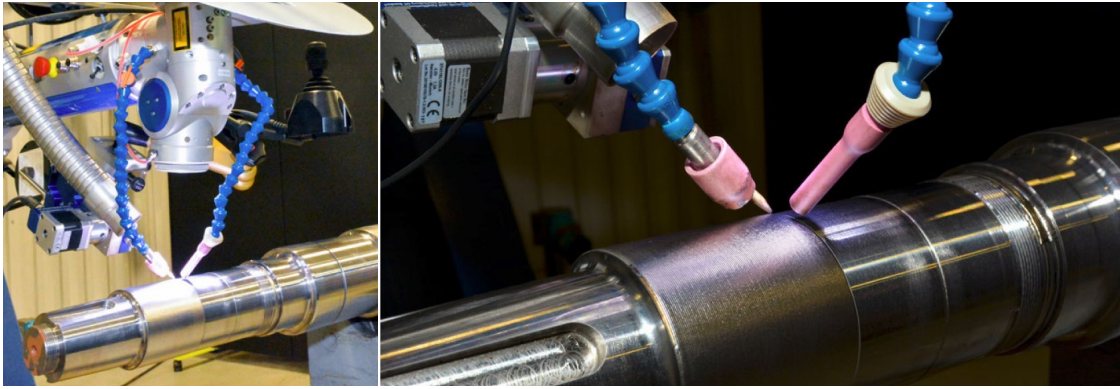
Laser welding system (left) the welding setup (right).
